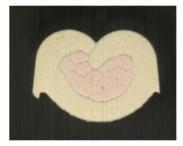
Micro-section of a defective sample with cracks, unsymmetrical
